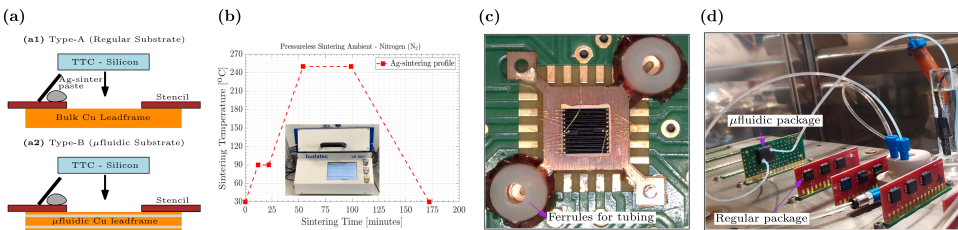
An overview of package assembly processes. (a) Stencil printing of Ag-sinter pastes on package substrate and die-placement. Two types of packages were assembled in this study: Type-A – Regular package with bulk copper leadframe and Type-B – Microfluidic package with microfluidic leadframe. (b) Sintering of Ag-paste under nitrogen. (c) Sintered TTC onto a microfluidic substrate, which is soldered onto a PCB and wire-bonded. Ferrules for inlet and outlet tubings are glued. (d) An indicative image of regular packages on PCBs and microfluidic packages with fluidic connections.
